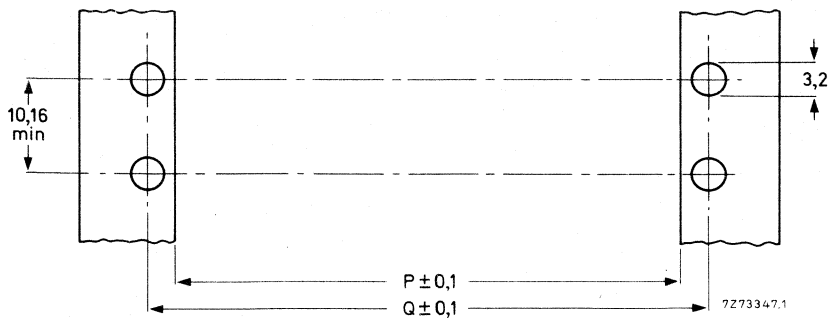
Piercing diagram for rail mounting; see Table 2 for dimensions P and Q.
